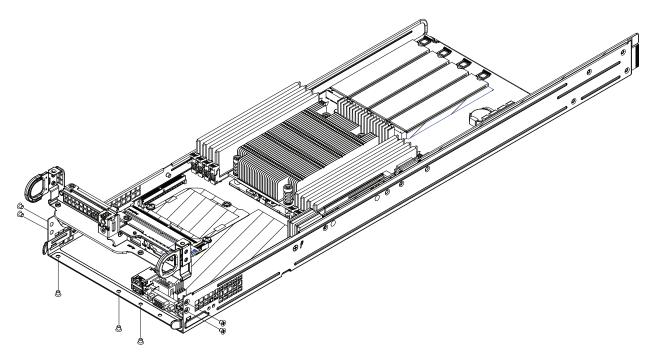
Removing Seven Screws from the Pulling Bracket
